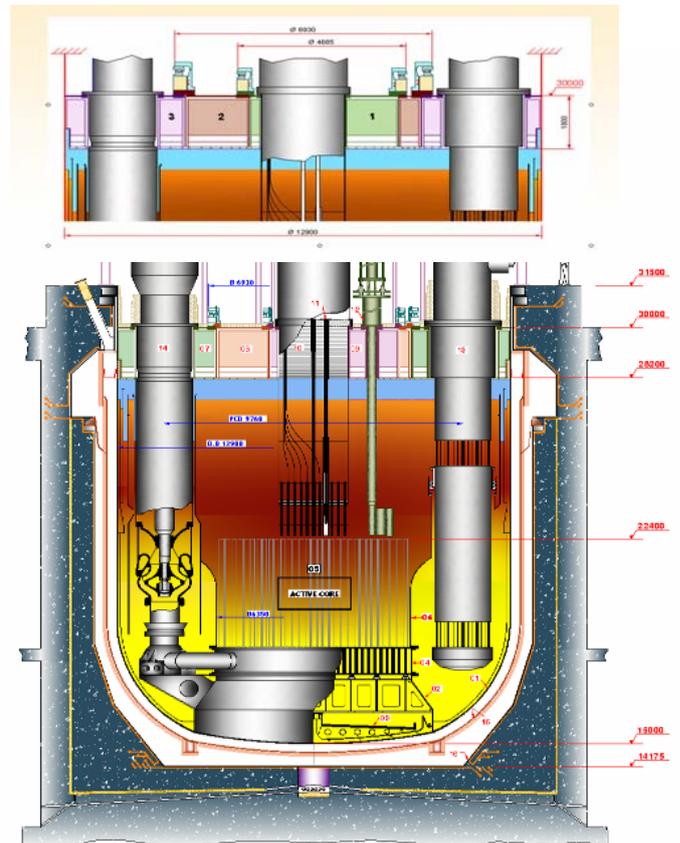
Typical pool type reactor assembly – Radiation streaming paths in top shield
